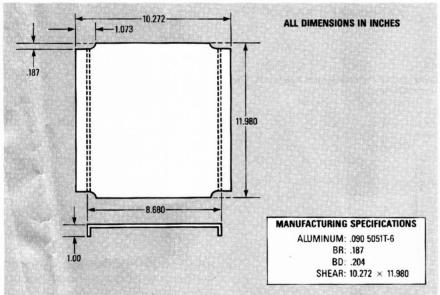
CUTTING AND BENDING GUIDE for the end covers. Due to the thickness of the aluminum used, the covers must also be notched for proper fit.
